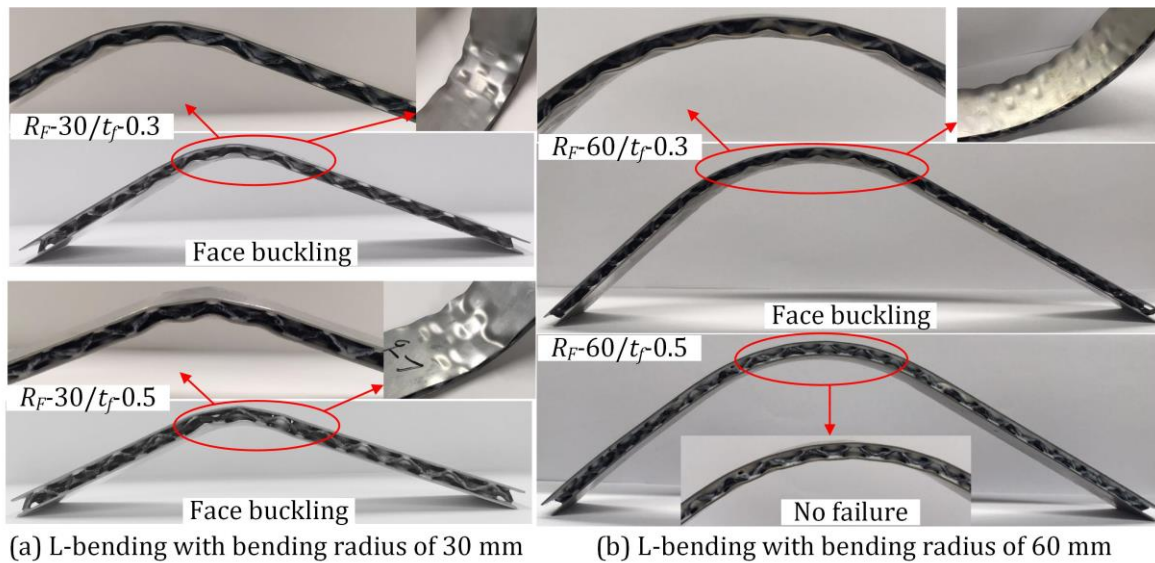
L-bending tests of sandwich sheets with SUS304 face sheets: (a) bending radius of 30 mm; (b) bending radius of 60 mm.
